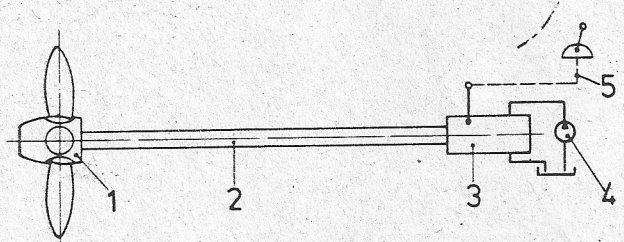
Main parts of a CP propeller equipment. 1 = propeller; 2 = shafting; 3 = actuating gear; 4 = hydraulic circuit; 5 = remote control.
